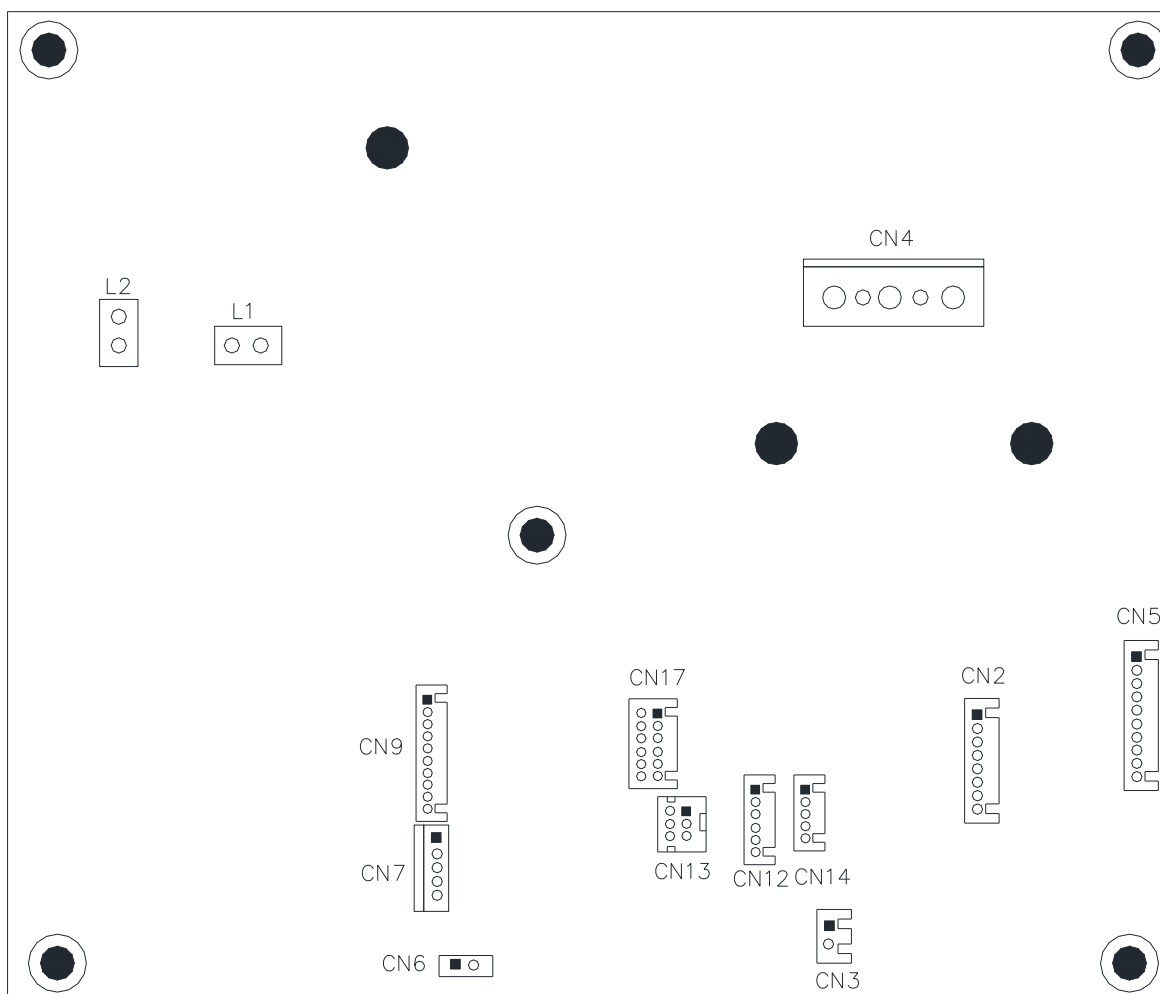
A(圖一 A) SV-860A,M CTL BOARD Connector
